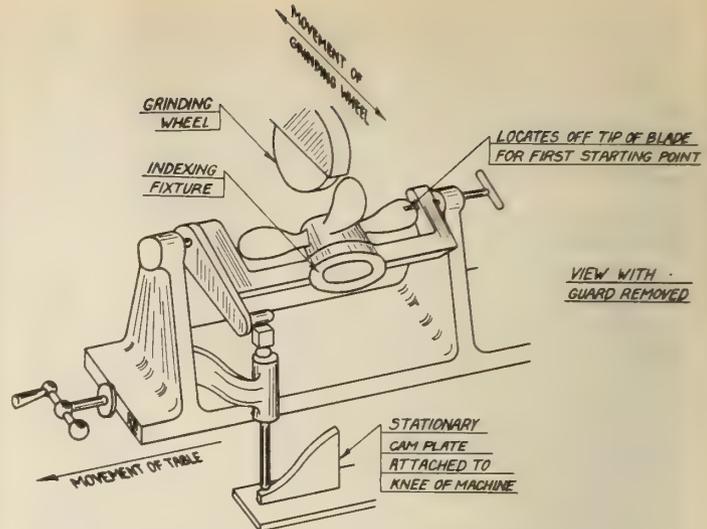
Illustrating the principle of the machine which incorporates a half horse-power, 3,600 r.p.m. motor, driving the 6 by 1/4 in. standard grinding wheel.
